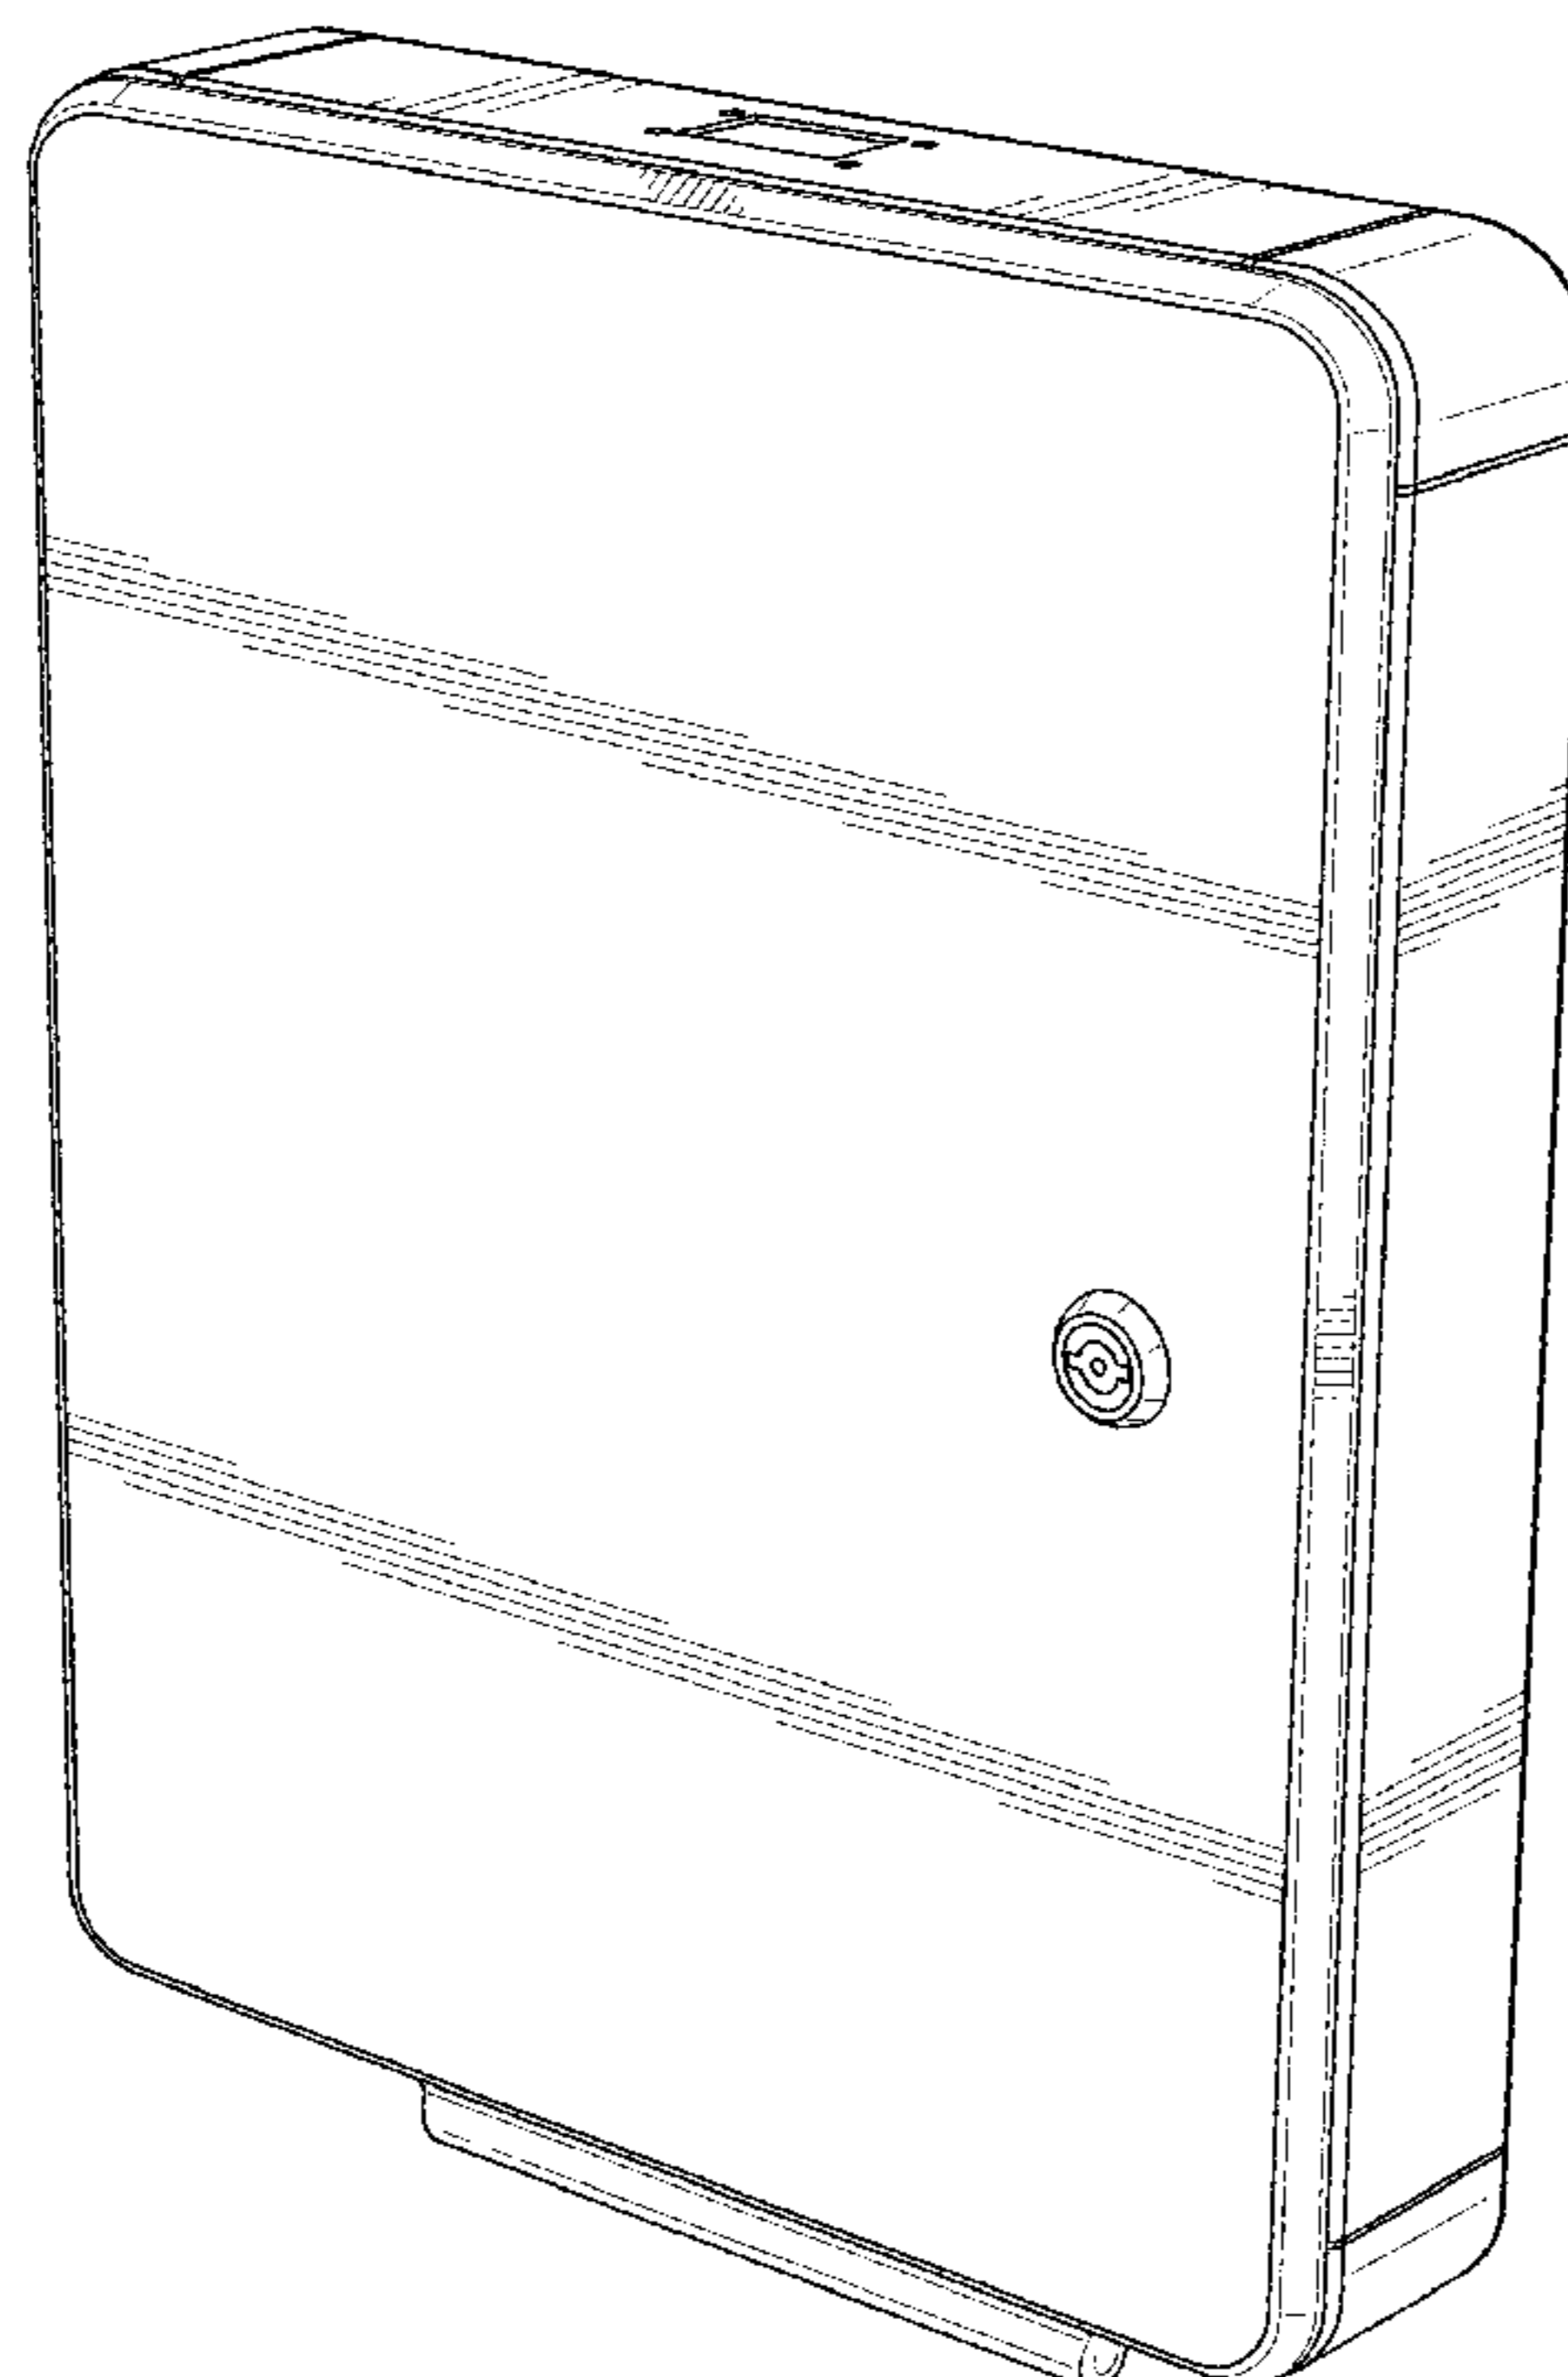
is a top front perspective view of an embodiment of a housing for electric and electronic components, showing the inventor's new design;
